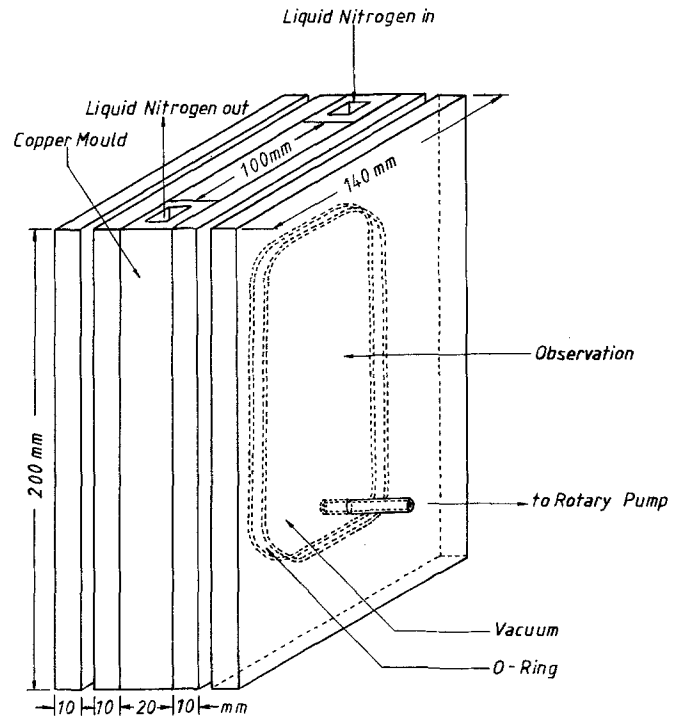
A sketch illustrating the perspex sided, U-shaped, double walled copper mould employed for non-metallic castings.
